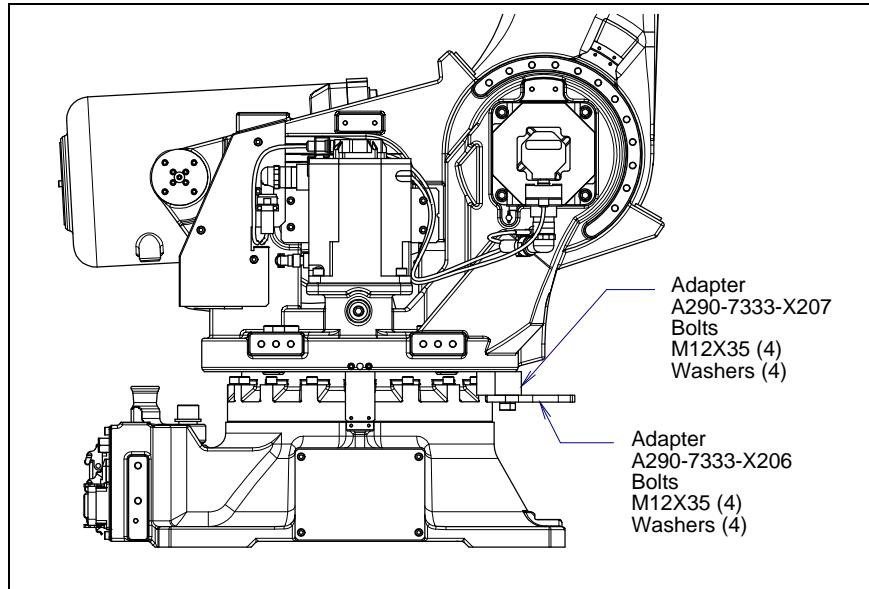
(b) Mounting the J1-axis adjustable mechanical stopper (1/2)
